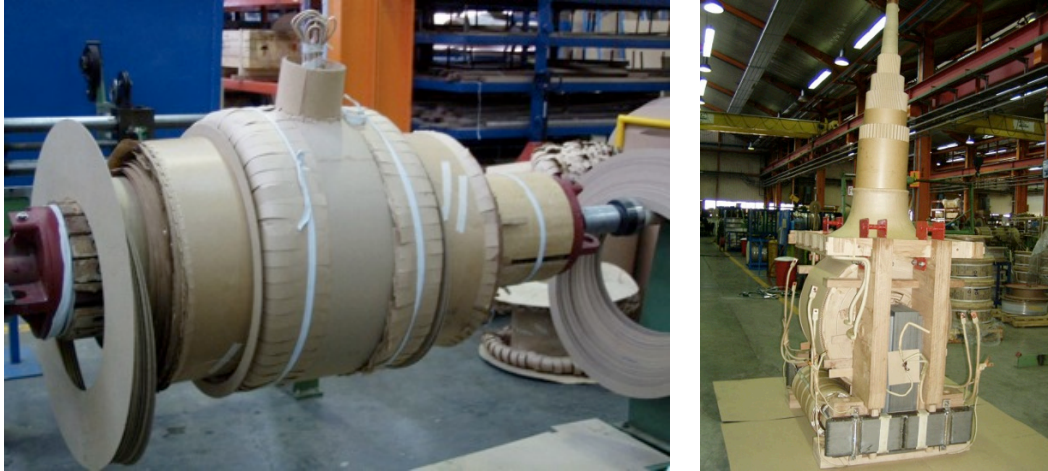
(Left) Single-phase transformer windings covered by pressboard layers and (Right): Single-phase high voltage transformer windings and bushing covered with pressboard layers ready for immersing in transformer oil [Courtesy of High Voltage Laboratory, University of Tehran, used with permission].
